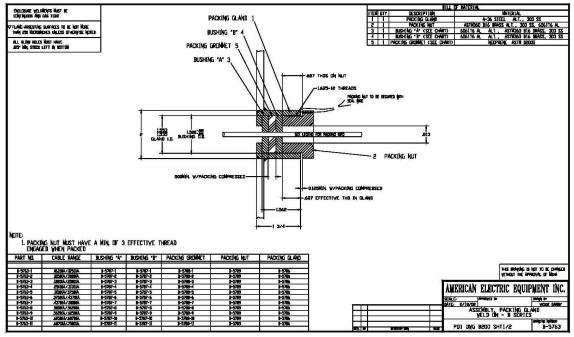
XP Enclosure Application OEM Packing Gland Specification Drawing
